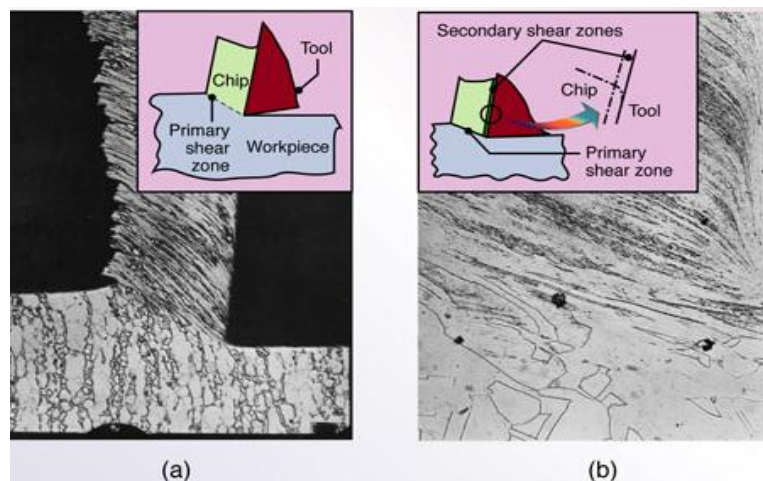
Chip produced in orthogonal cutting (a) continuous chip with narrow, straight, and primary shear zone; (b) continuous chip with secondary shear zone at the chip-tool interface.
